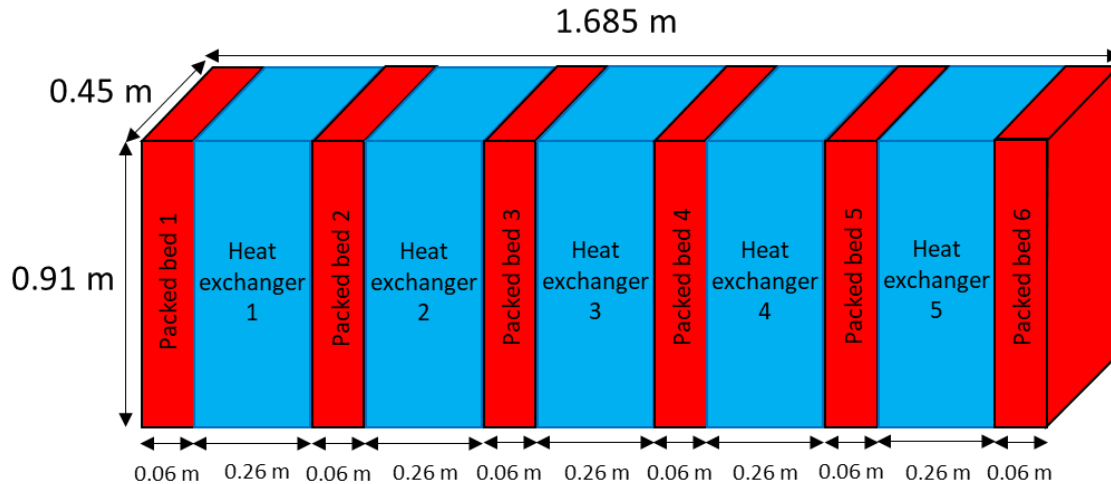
Final design configuration and dimensions of the IHXR unit.
